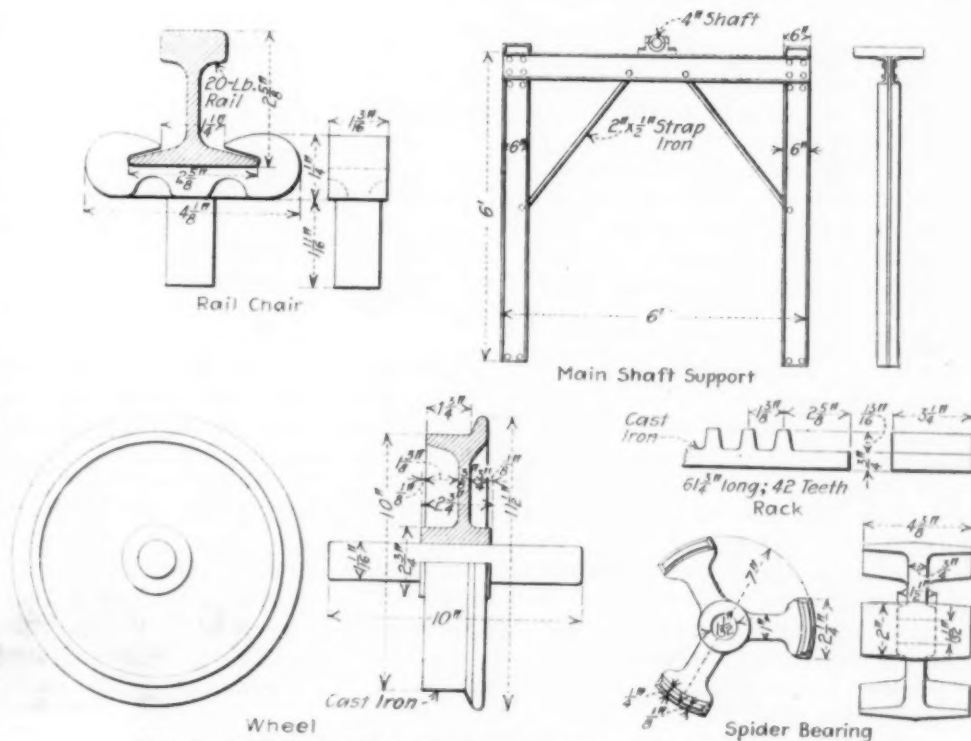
DETAILS OF MACHINERY USED IN CHANNEL PROCESS
